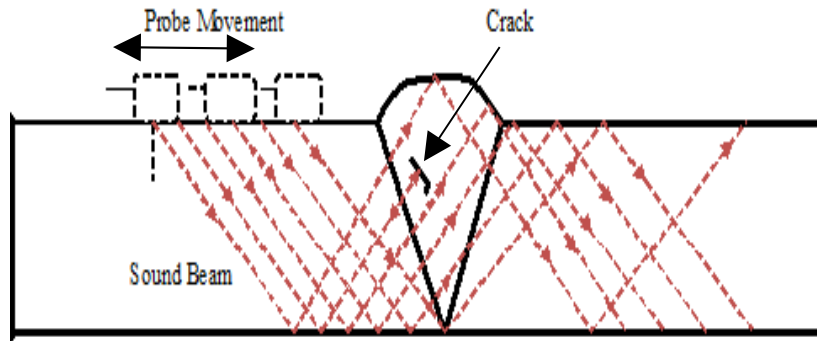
, Inspection of Weld with Angle Beam Probe
